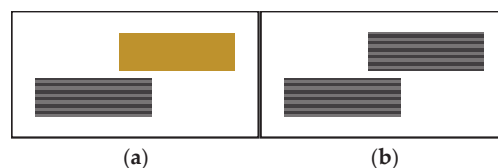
Single-lap welded joints for USW (a) welding of PEI on CF/PEEK and (b) welding of CF/PEEK on CF/PEEK with  $250 \mu\text{m}$  thick PEI as energy director (yellow bars are for PEI, grey bars for CF/PEEK).
